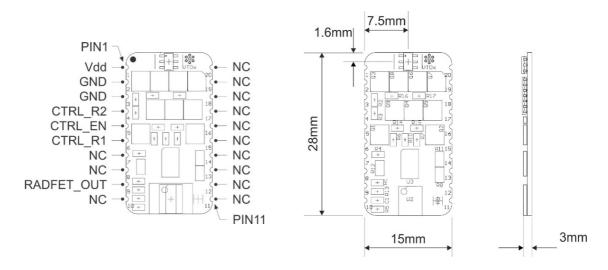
RM-VT01-A connector assignment and PCB outline drawing and dimensions.
